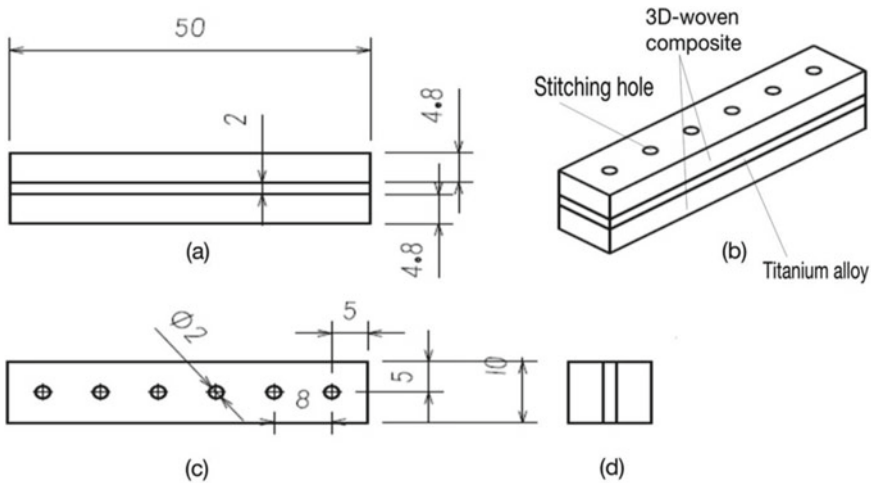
Experimental piece of short-beam strength test a front view, b equiaxial test view, c top view, and d side view
